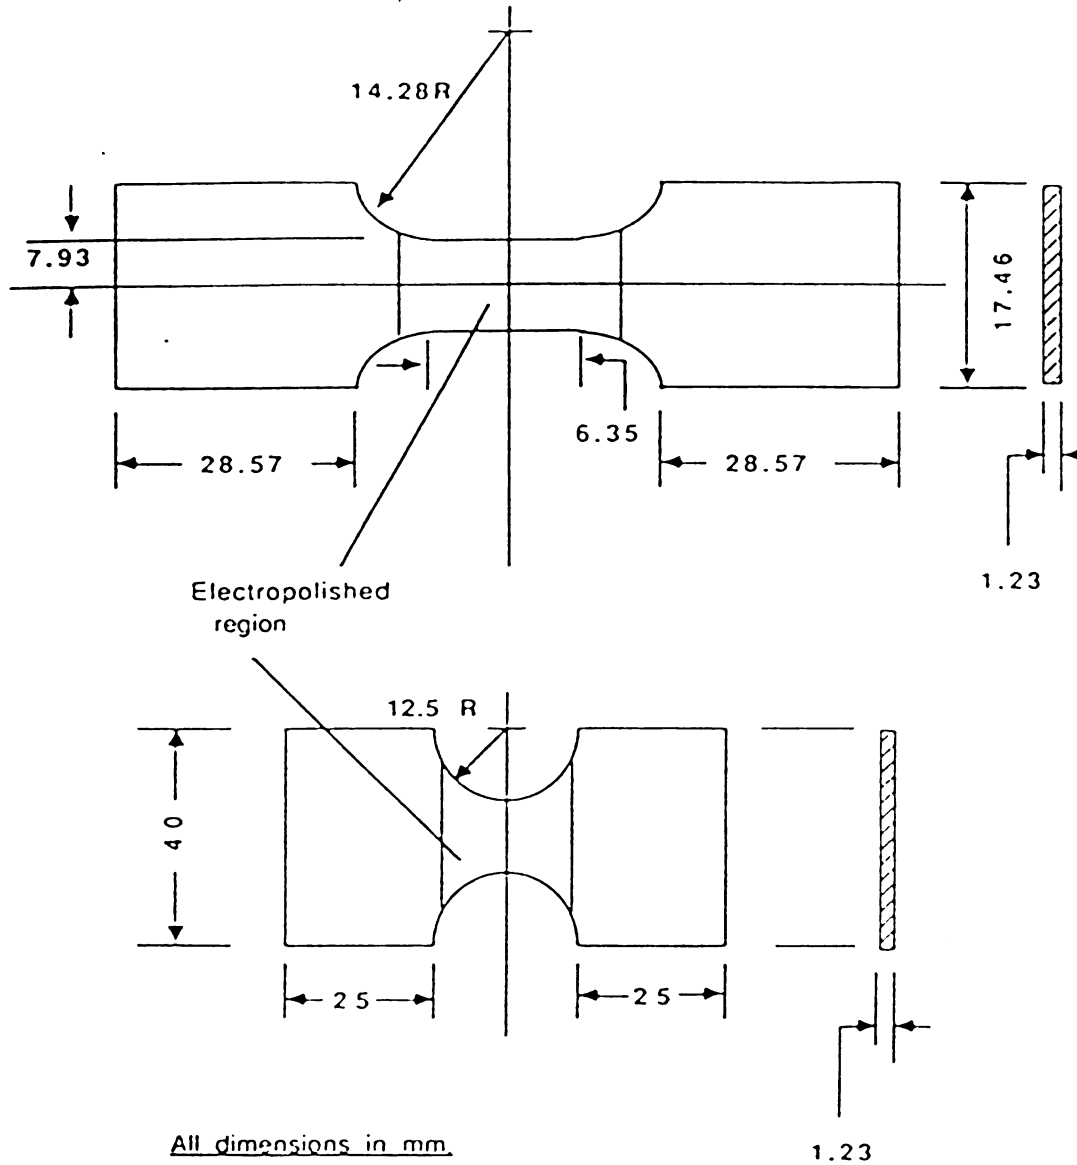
Specimen Designs for Fatigue Testing. Straight edge specimens (top) ; Hour-glass specimens (bottom).
